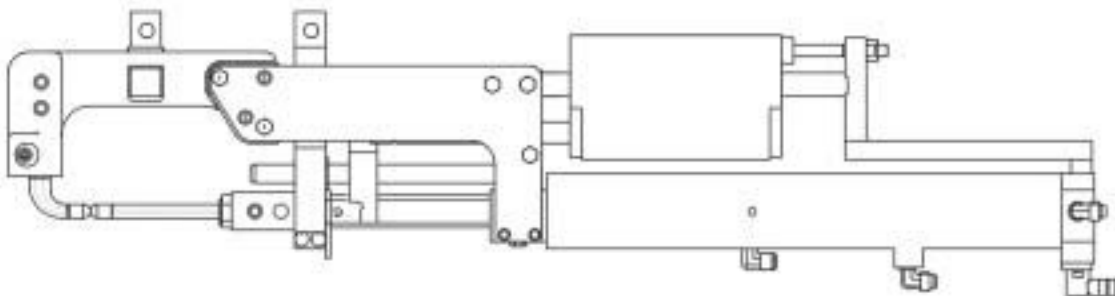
Fixture Style, C-Type Gun wo/Transformer
